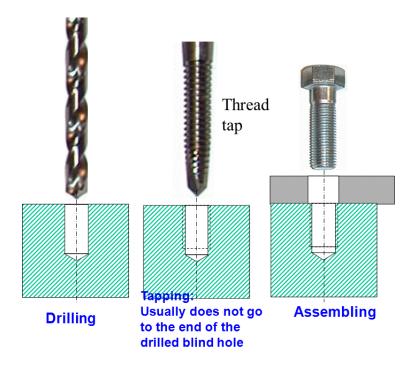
Drilling, tapping, and assembly of a thick member.
